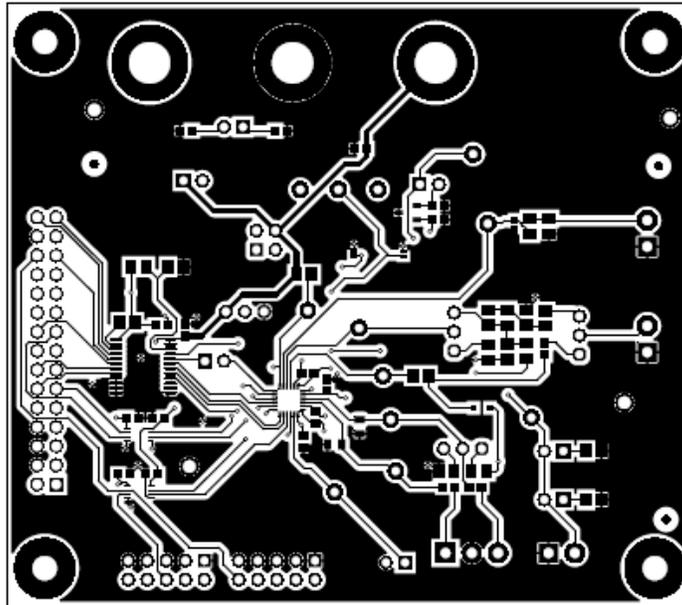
AFE881H1EVM PCB Top Layer Layout
